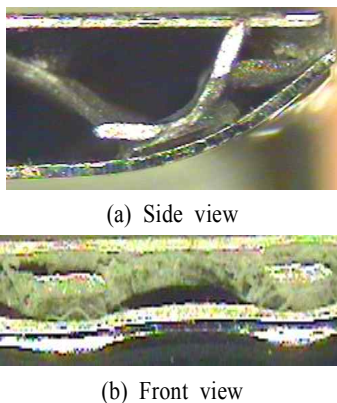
Sheared surface of ISB sheet metal at position 1 (adhesive-bonded)
